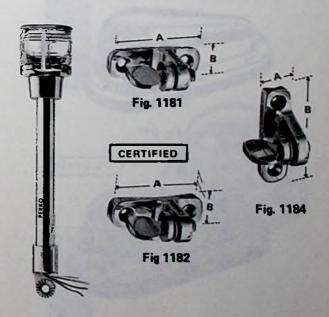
for flat windshield or horizontal frame, dimensions, Width (A), 2" — Height (B), 5/8". Spare Brackets, Specify Fig. 1120
